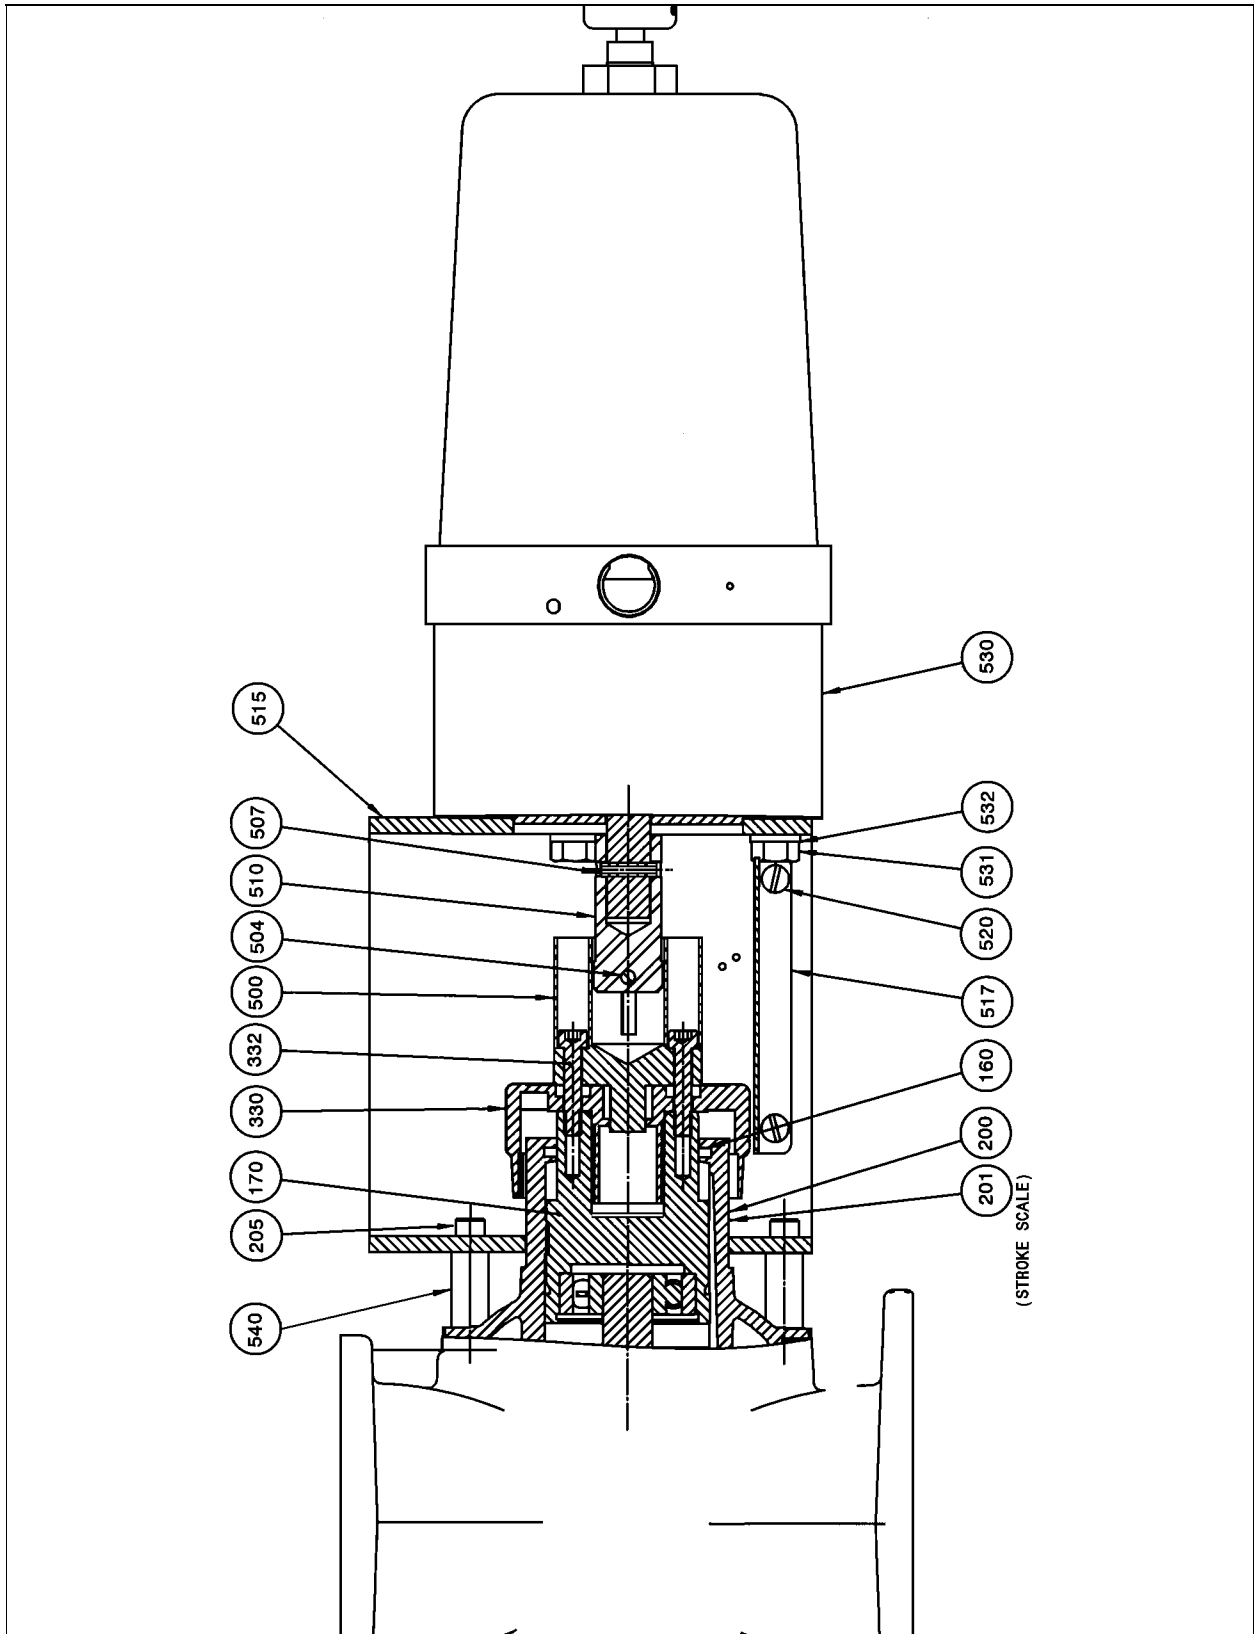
(Sheet 2 of 2). MacRoy "D" ECC Mounting (DWG. 1022728000)
